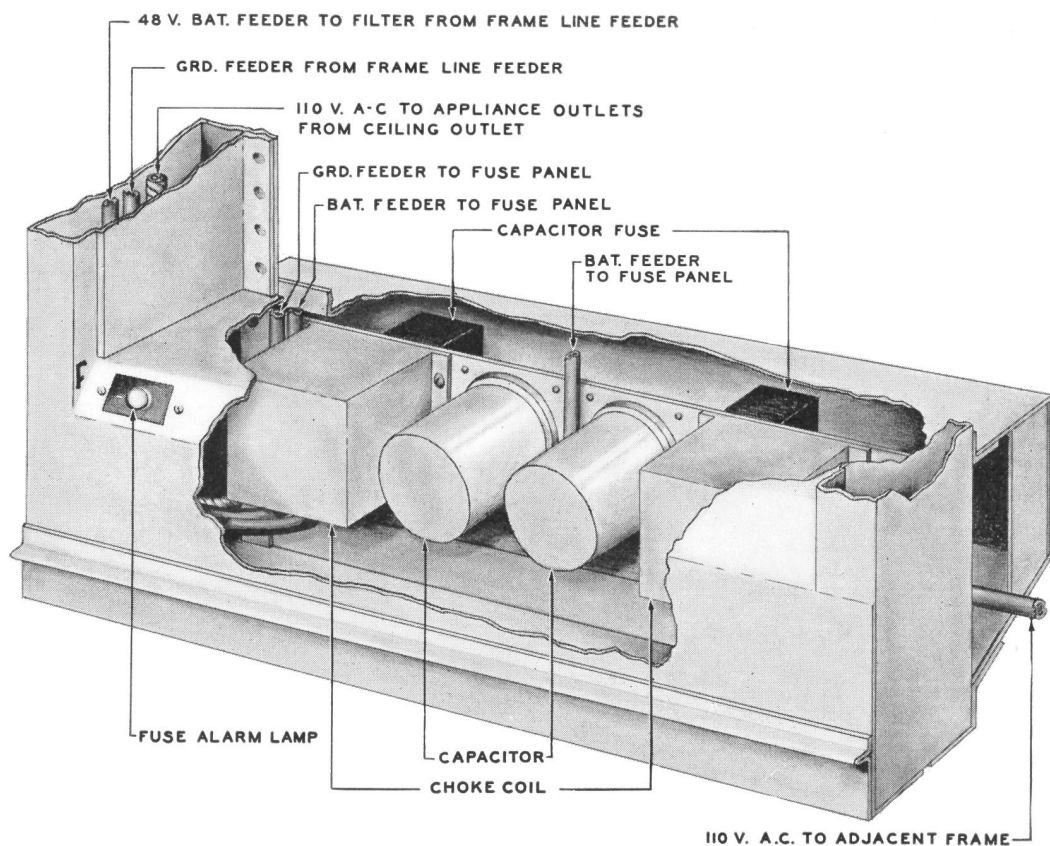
Perspective drawing showing arrangement of base of the No. 5 crossbar frame.
